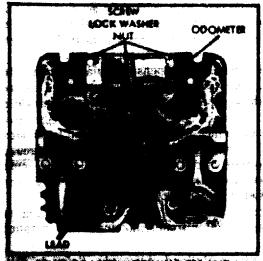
Disassembly/assembly - driver's indicator panel assembly (3 of 3).
